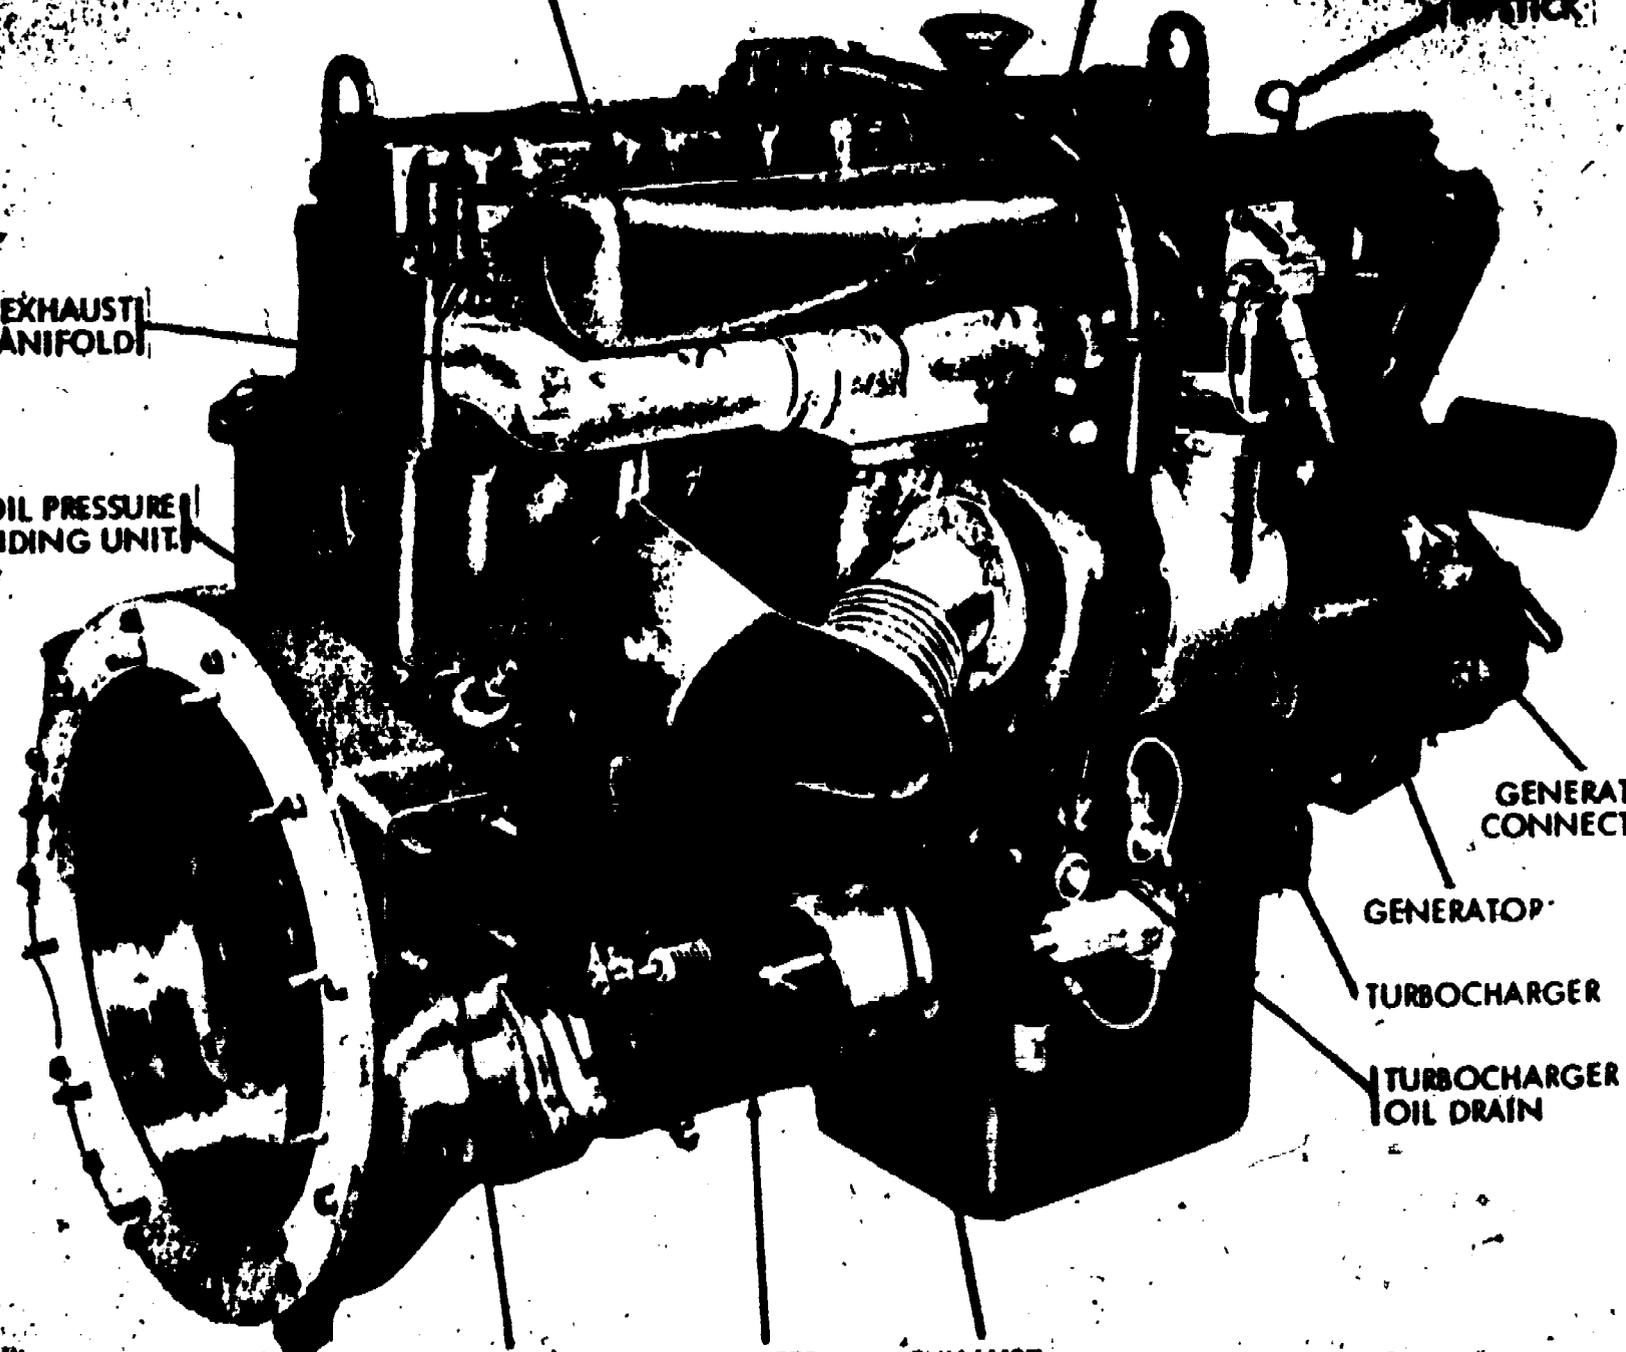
Right Flywheel End View LDS-465-1 Multifuel Engine.
